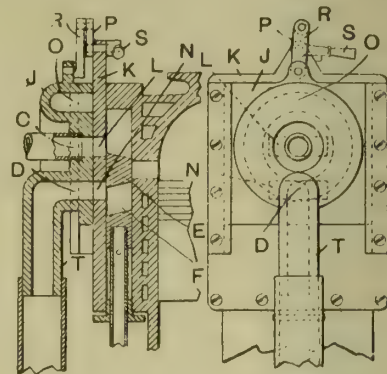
ROWAN'S VALVE MECHANISM FOR INTERNAL-COMBUSTION ENGINES.
